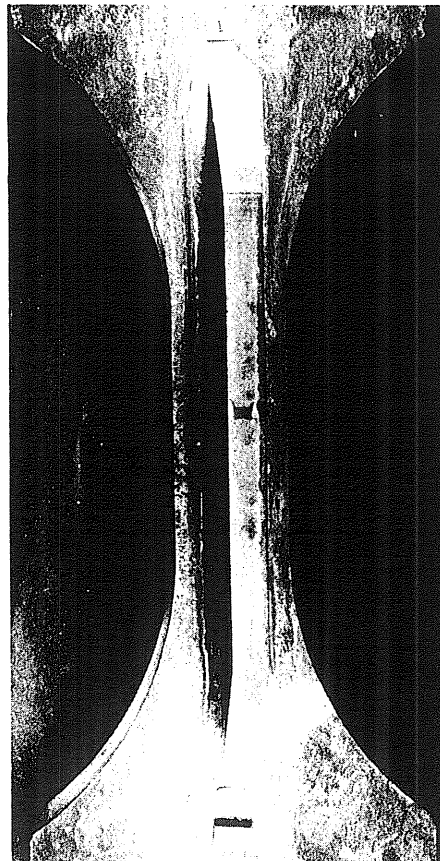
FATIGUE CRACKS IN A SPECIMEN WITH LONGITUDINAL FILLET WELDED ATTACHMENTS ON TWO SIDES — SOUTH FACE.
